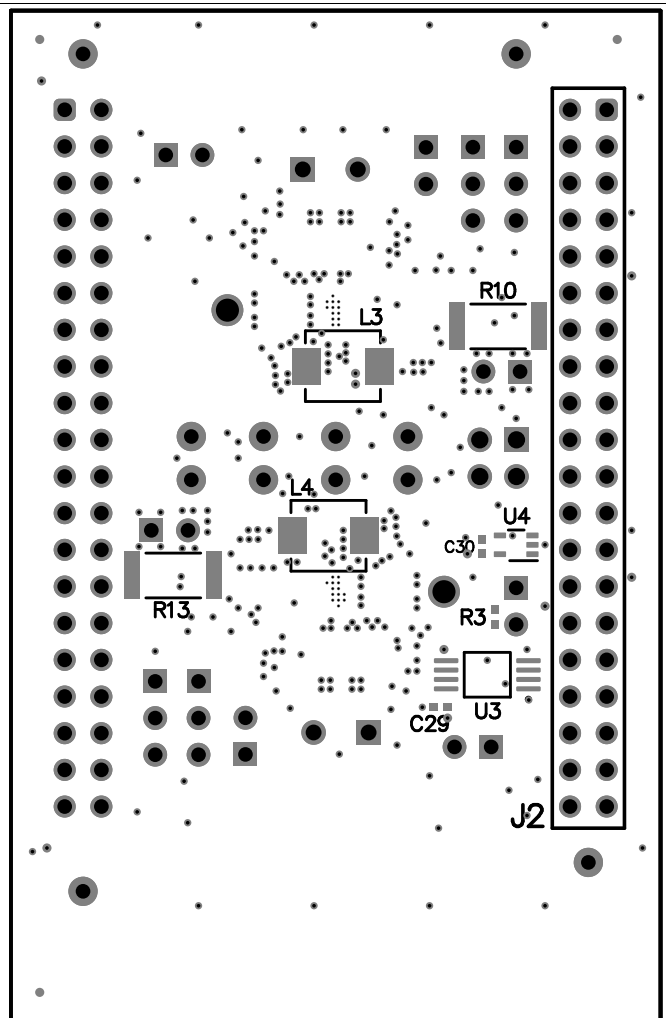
TAS2562YFPEVM-DC Bottom Assembly
